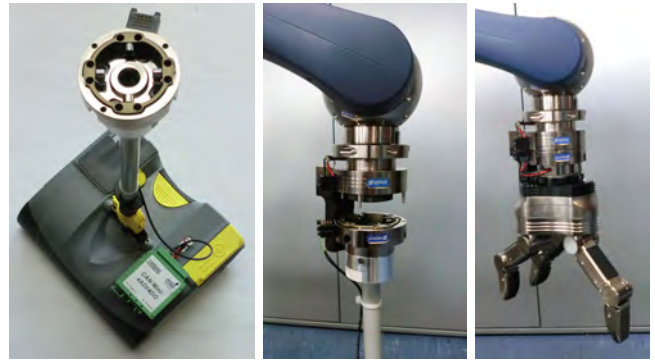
Vacuum cleaner with tool changer adapter, tool changing mechanism and attached hand.
